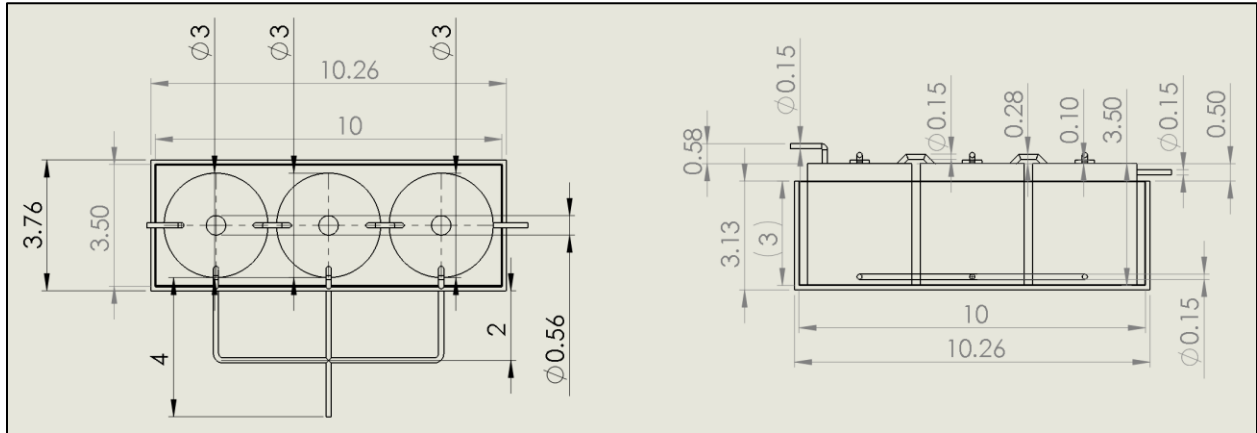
Dimensioned SolidWorks drawing of the below-ground, plastic tank system
